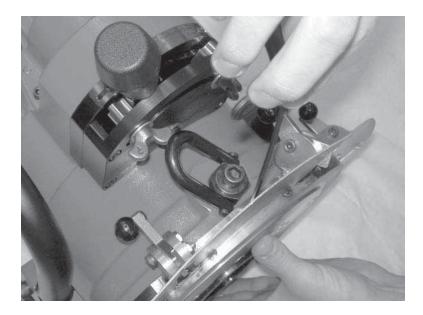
Loosen the set screws holding the trip assembly to the housing.
